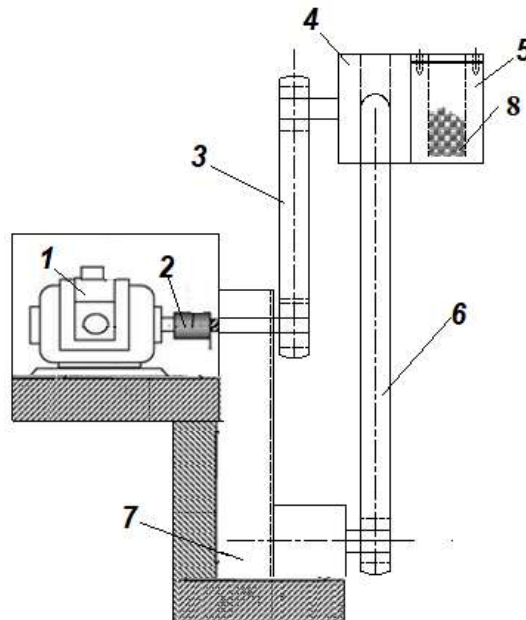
Scheme of a rocker mill: 1 - electric motor; 2 – coupling; 3- crank; 4- stone; 5 - glass; 6 - rocker arm; 7 - mill body; 8 - grinding bodies
